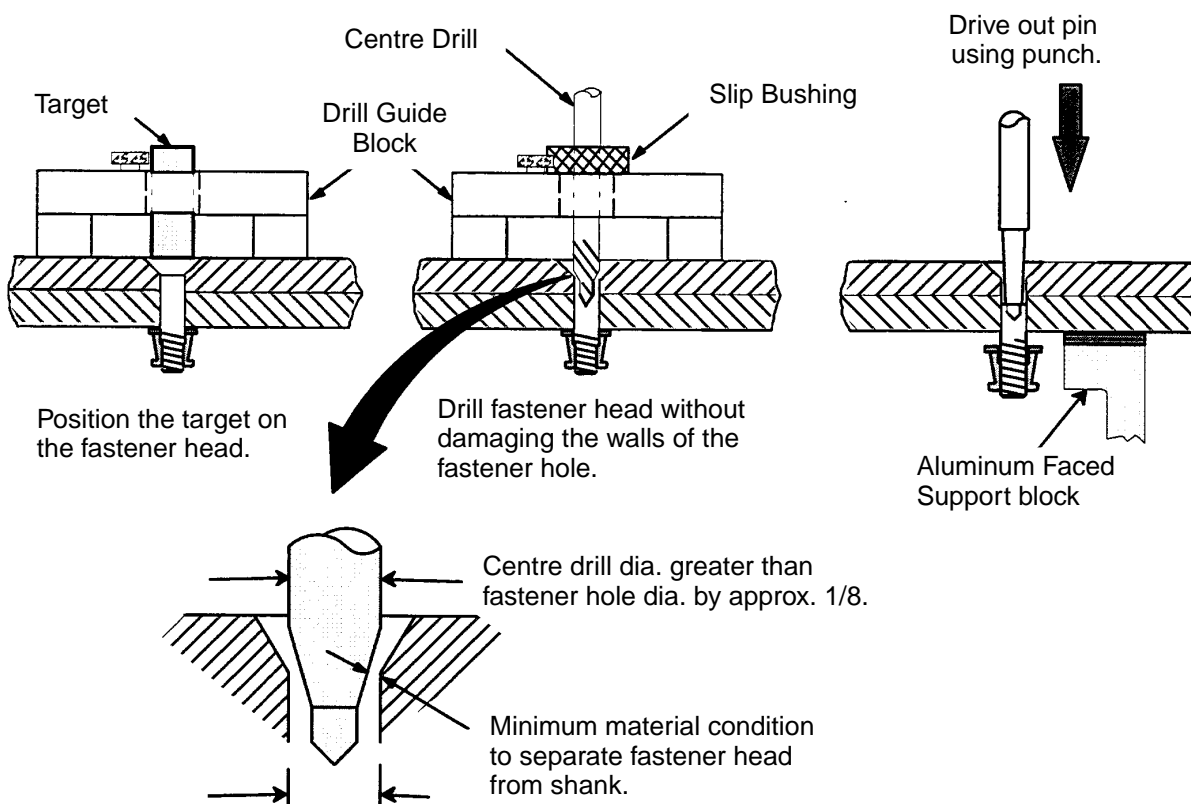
Removal of Installed Fasteners - Drill Out Method
